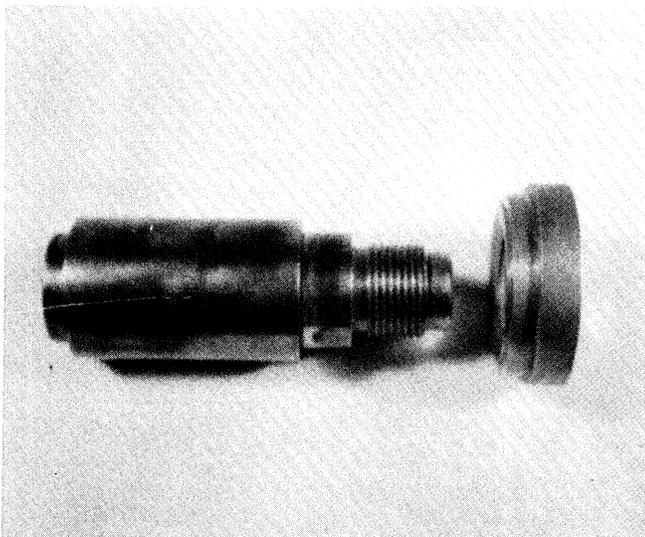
Needle Bearing Tool for Bearing in Mechanism Base
